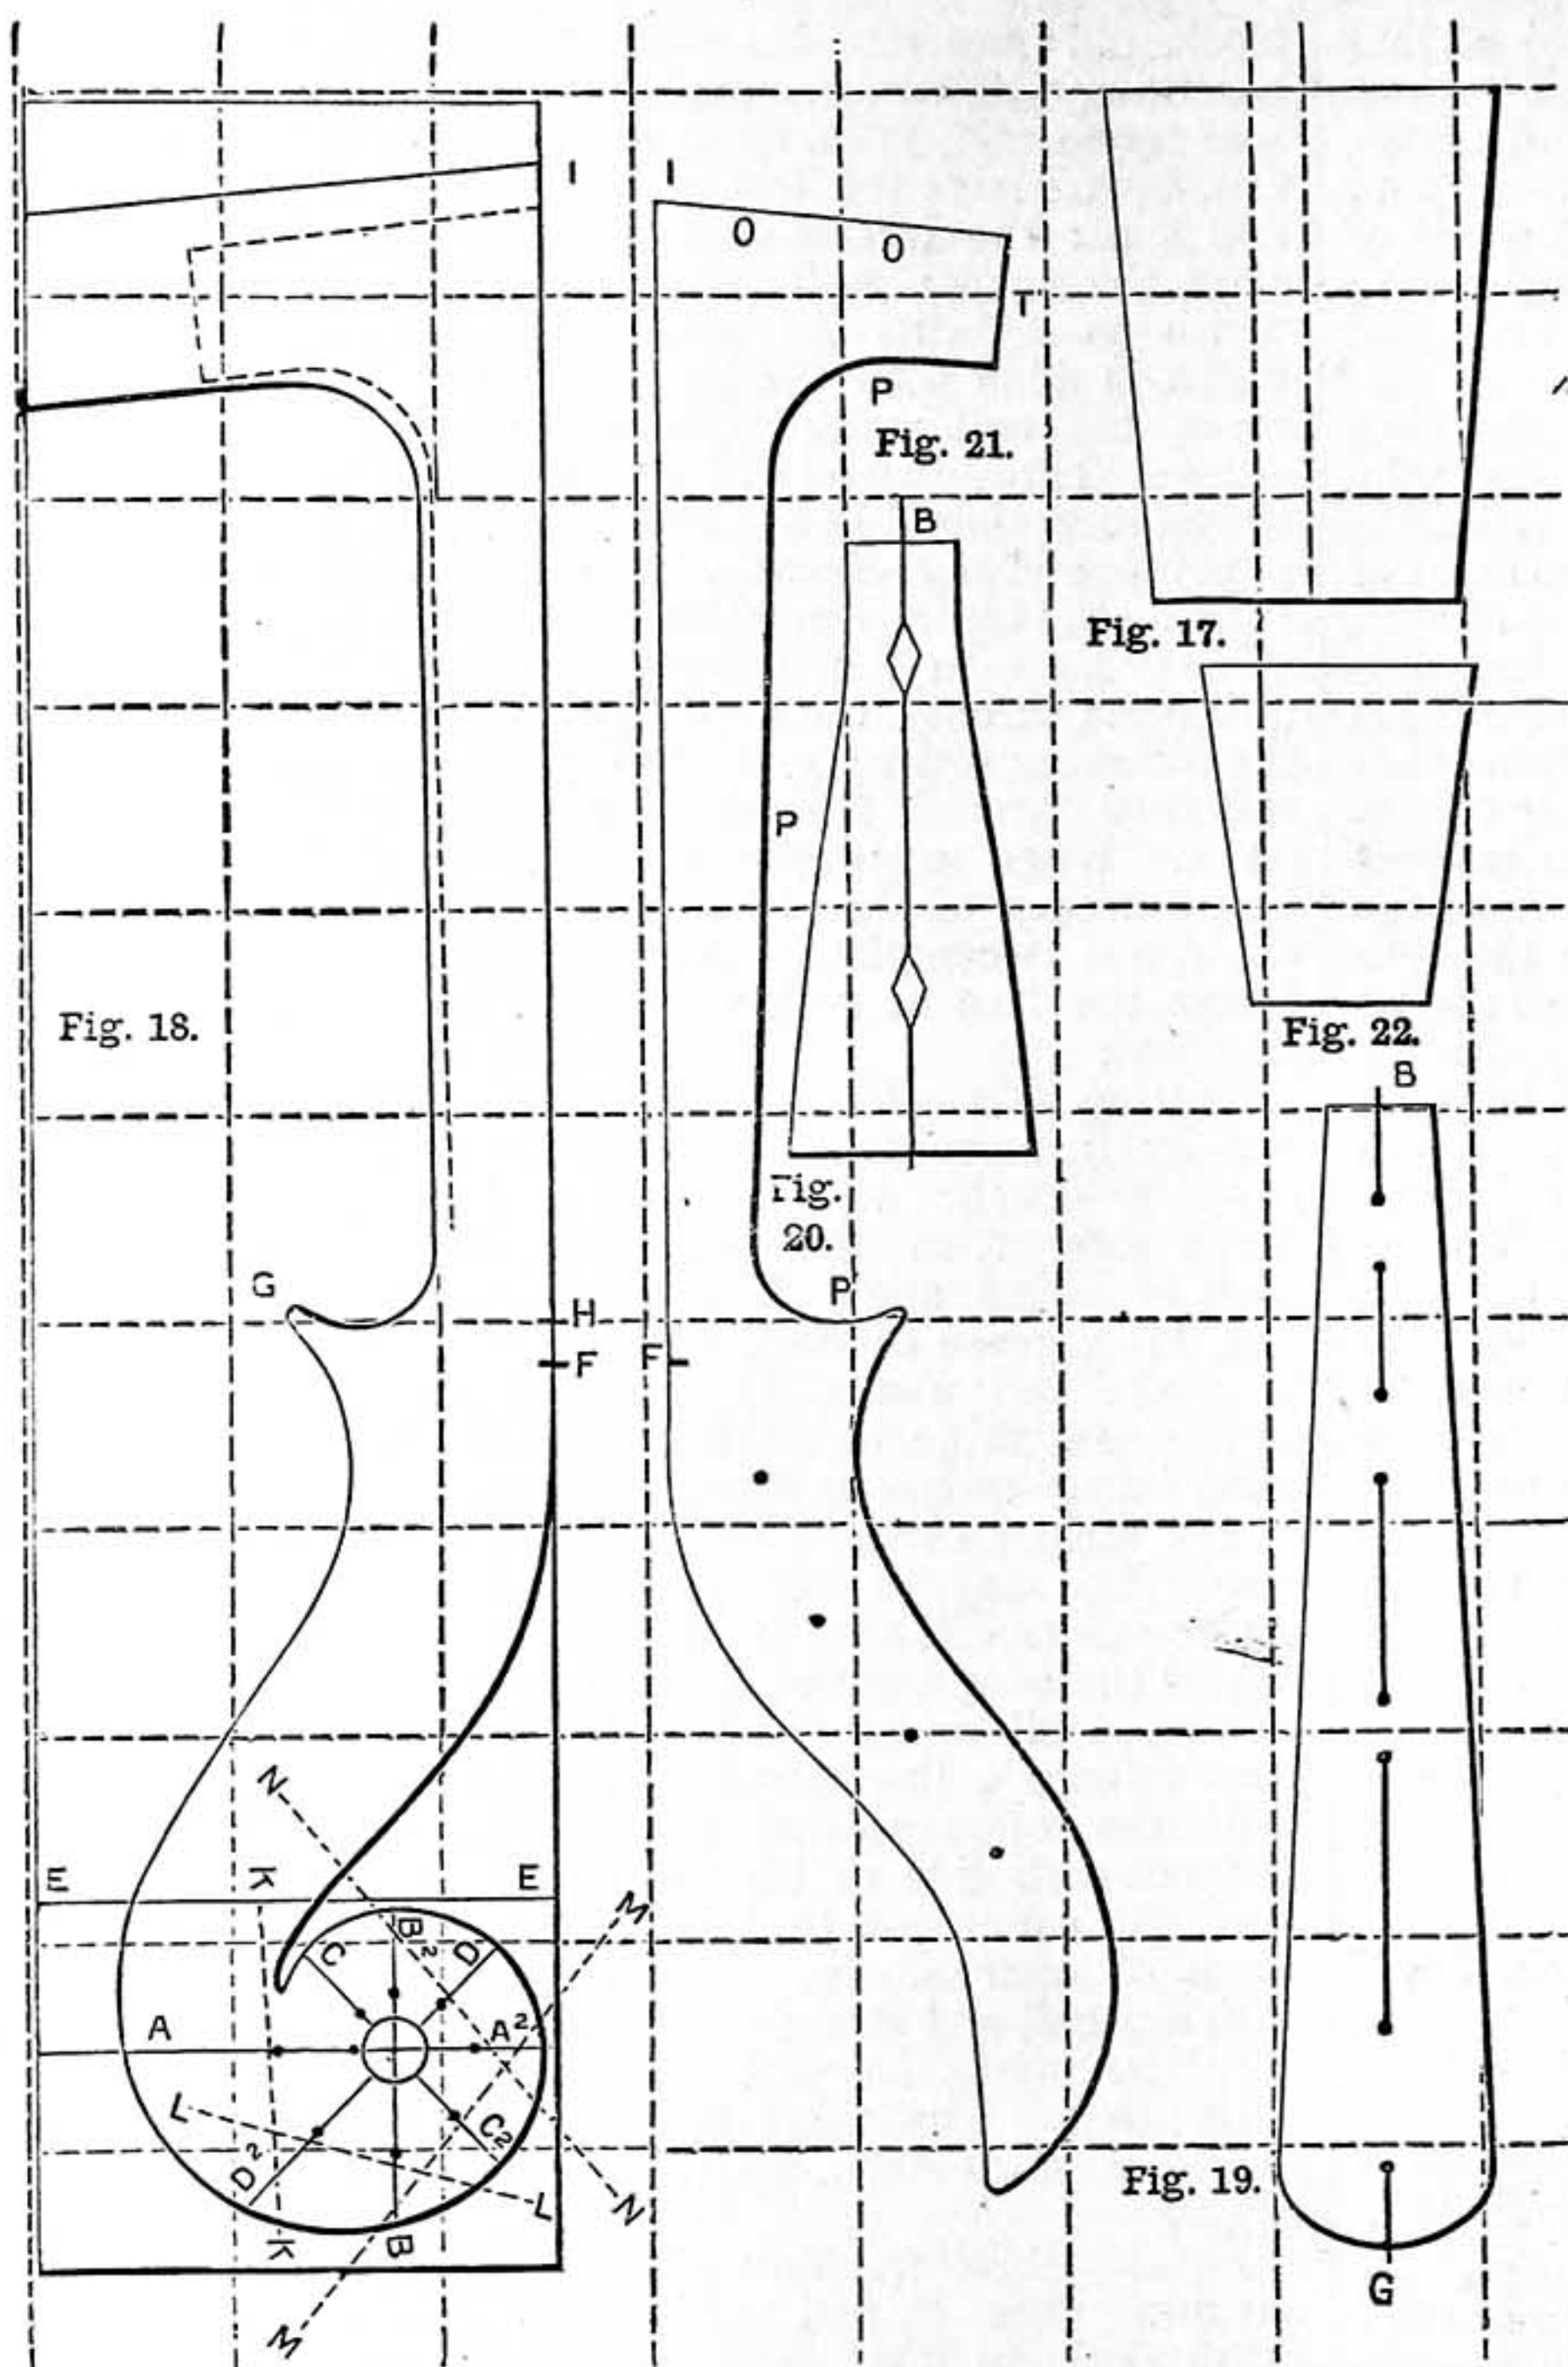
Section of Block for making Neck and Scroll. Fig. 18.—Pattern for making Neck and Scroll. Fig. 19.—Outline of Head (Back). Fig. 20.—Outline of Head (Front). Fig. 21.—Pattern of Neck. Fig. 22.—Pattern for cutting Bevel for Shoulder. All the above Figs. are half size, and divided into Squares for Enlargement to full size.
